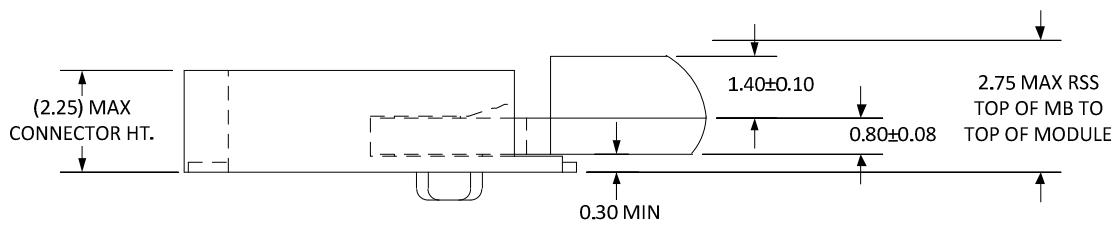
H2.3-S3 - Stack-up Top Mount Single Sided Module for 1.50 Maximum Component Height
